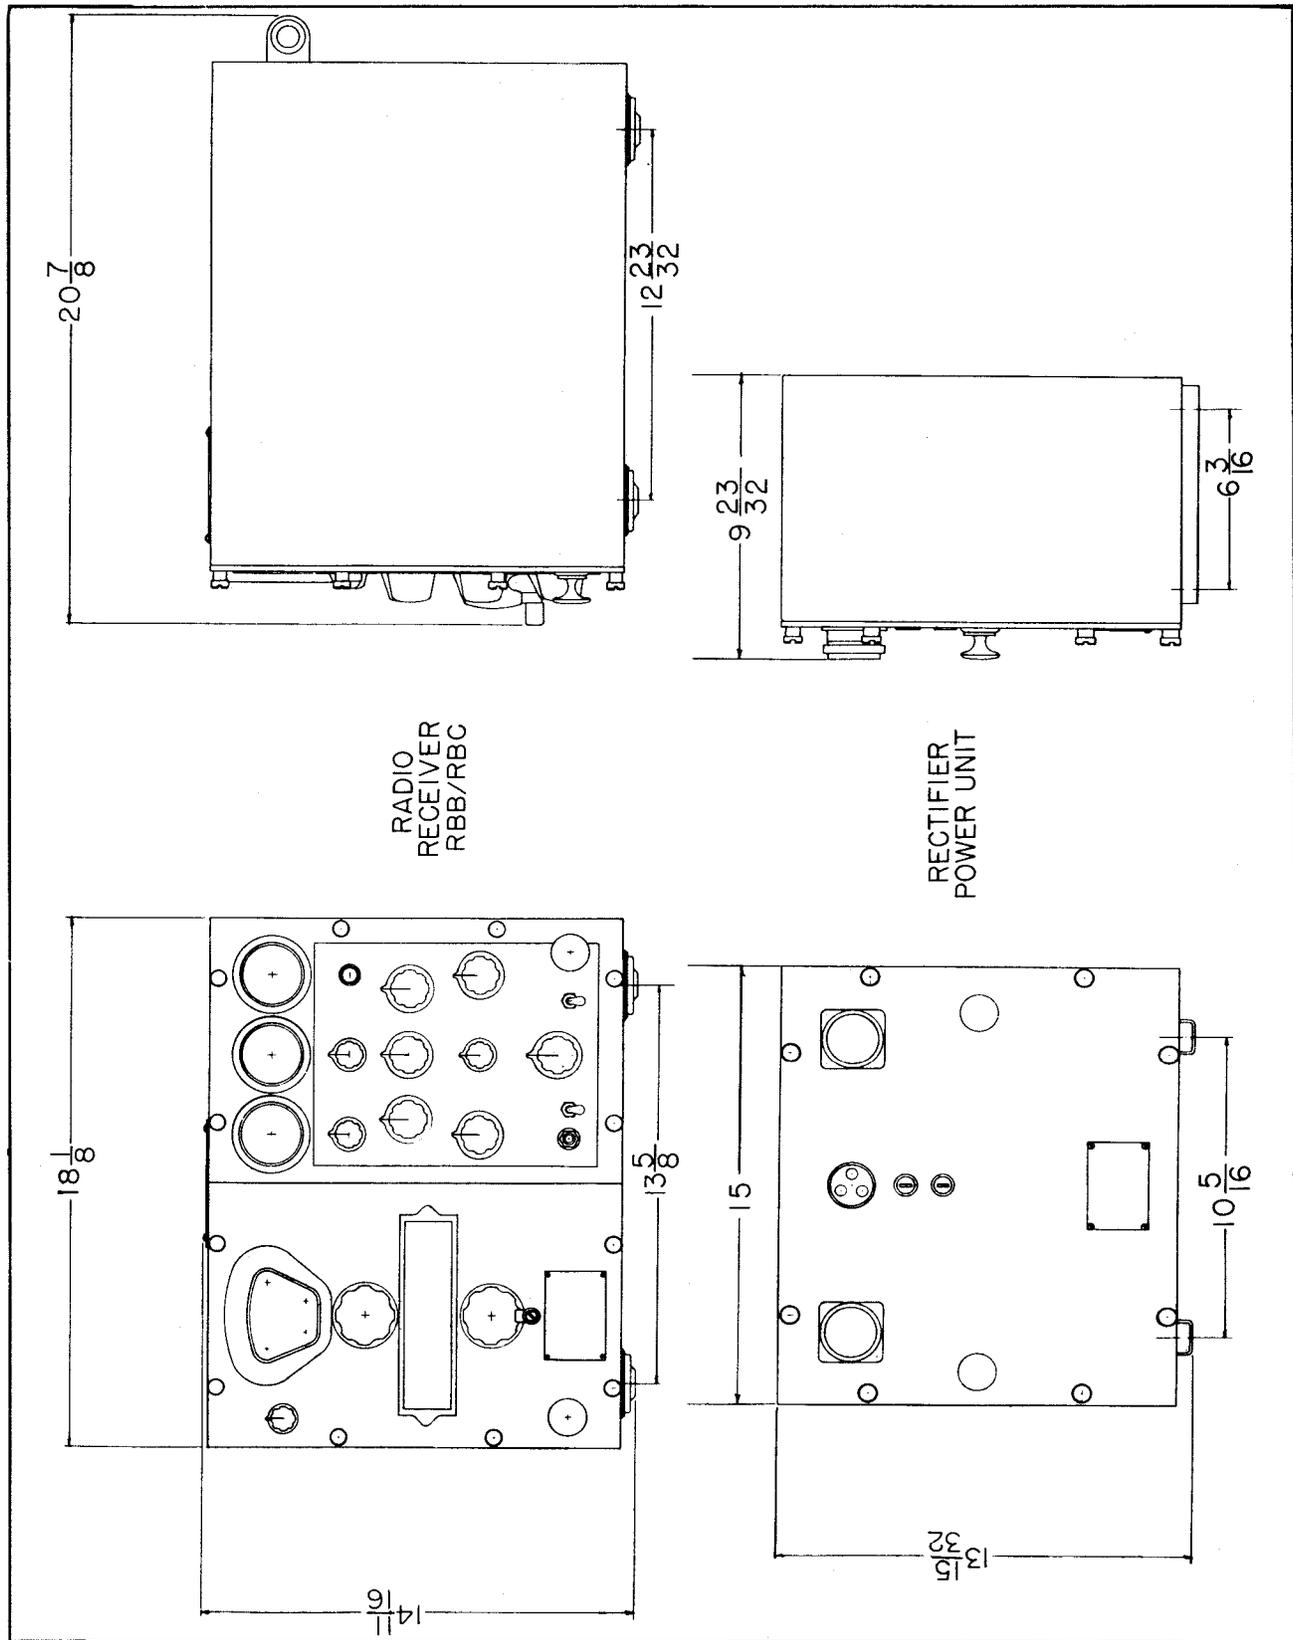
RBB-5/RBC-5 Shelf-Mounting Dimensions and Outline
